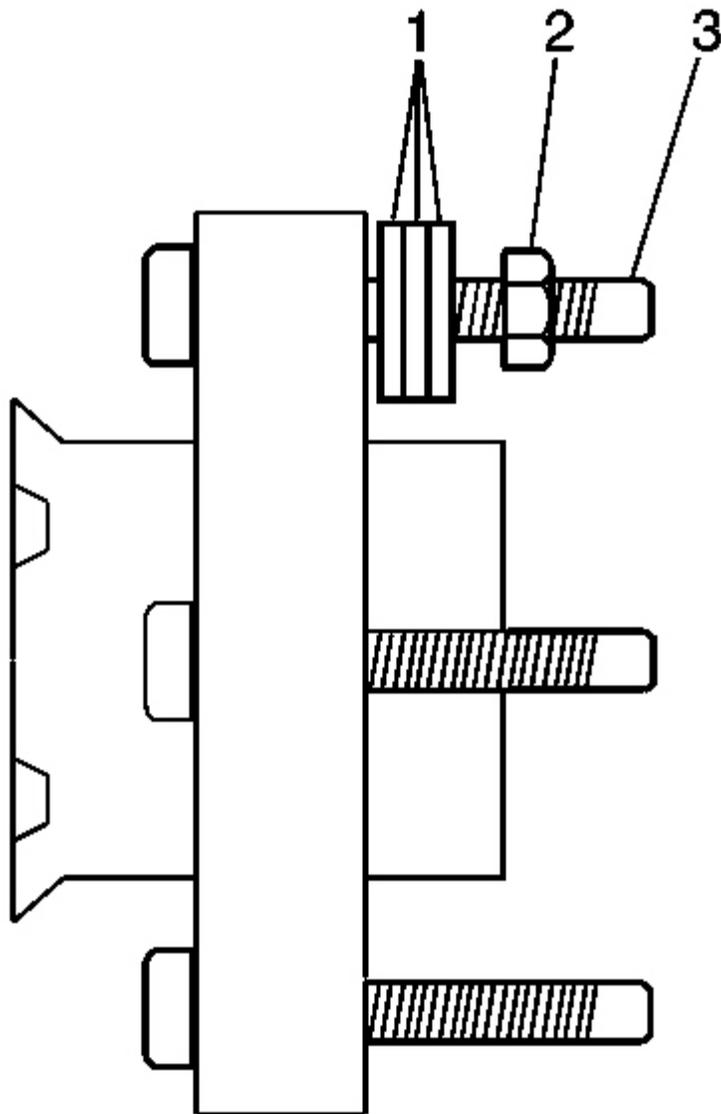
Identifying Washers, Wheel Stud & Hex Nut
